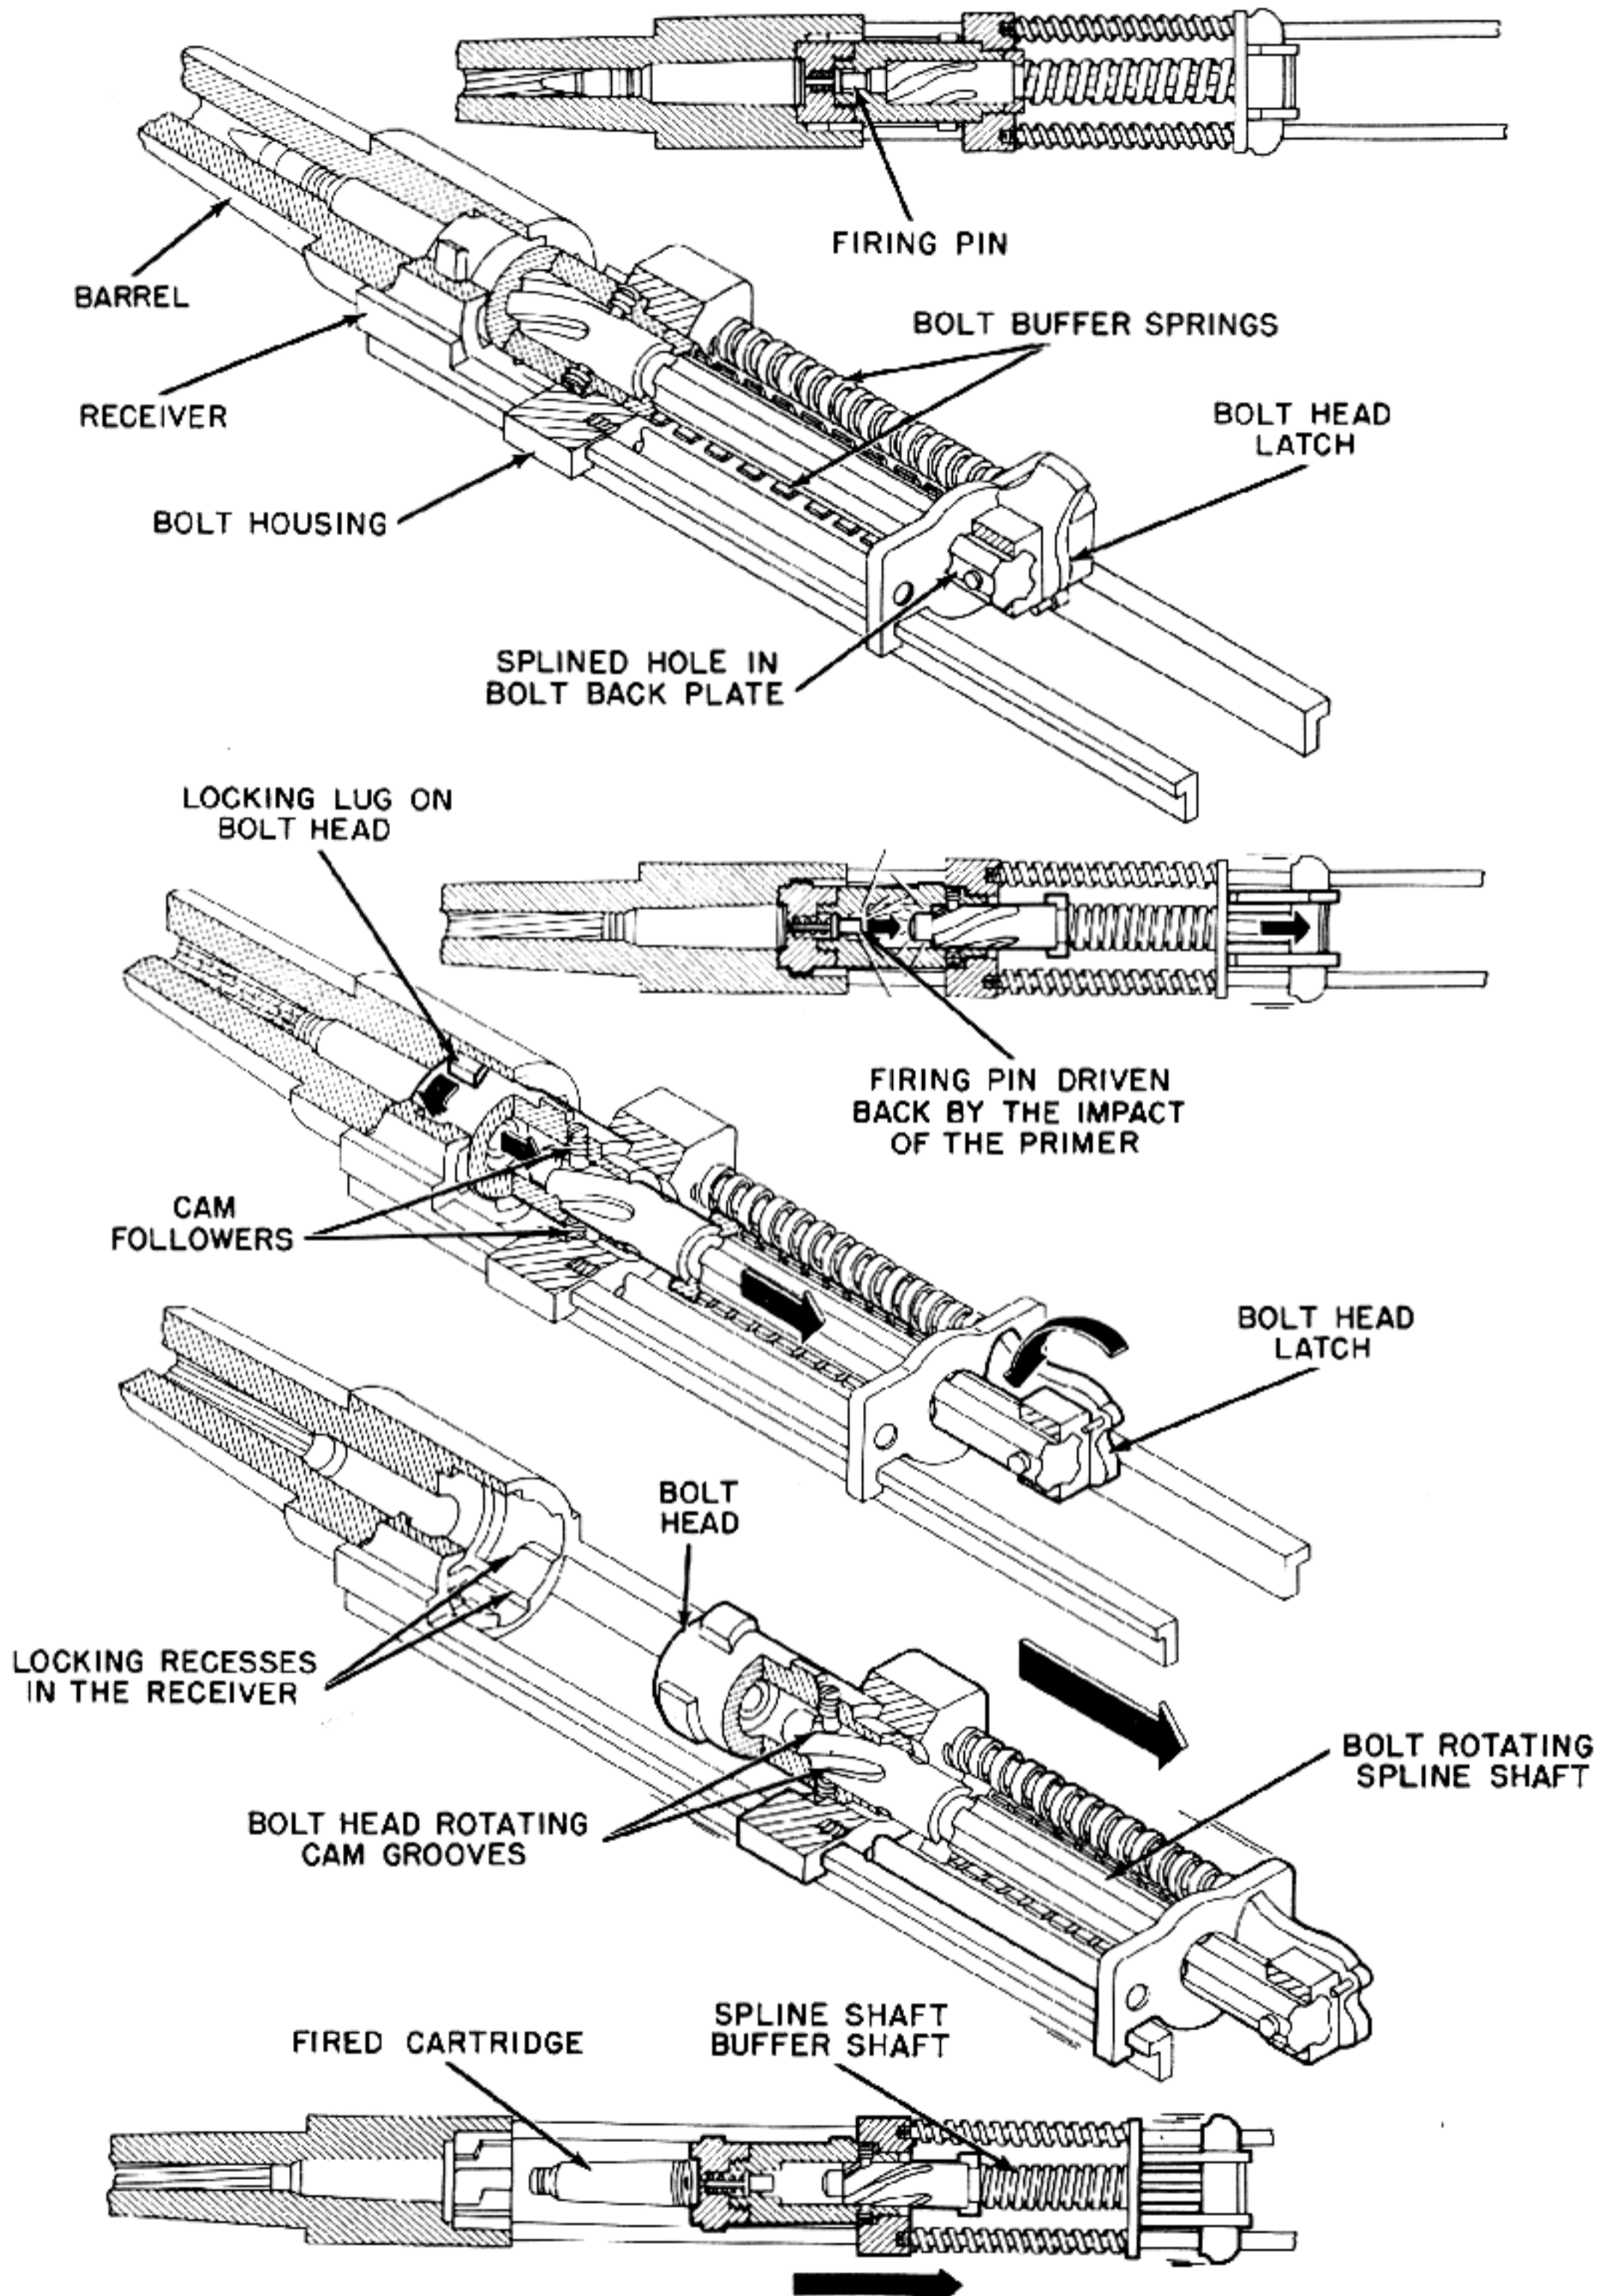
Rearward Thrust of Primer and Firing Pin Causes Bolt Head To Be Unlocked.
